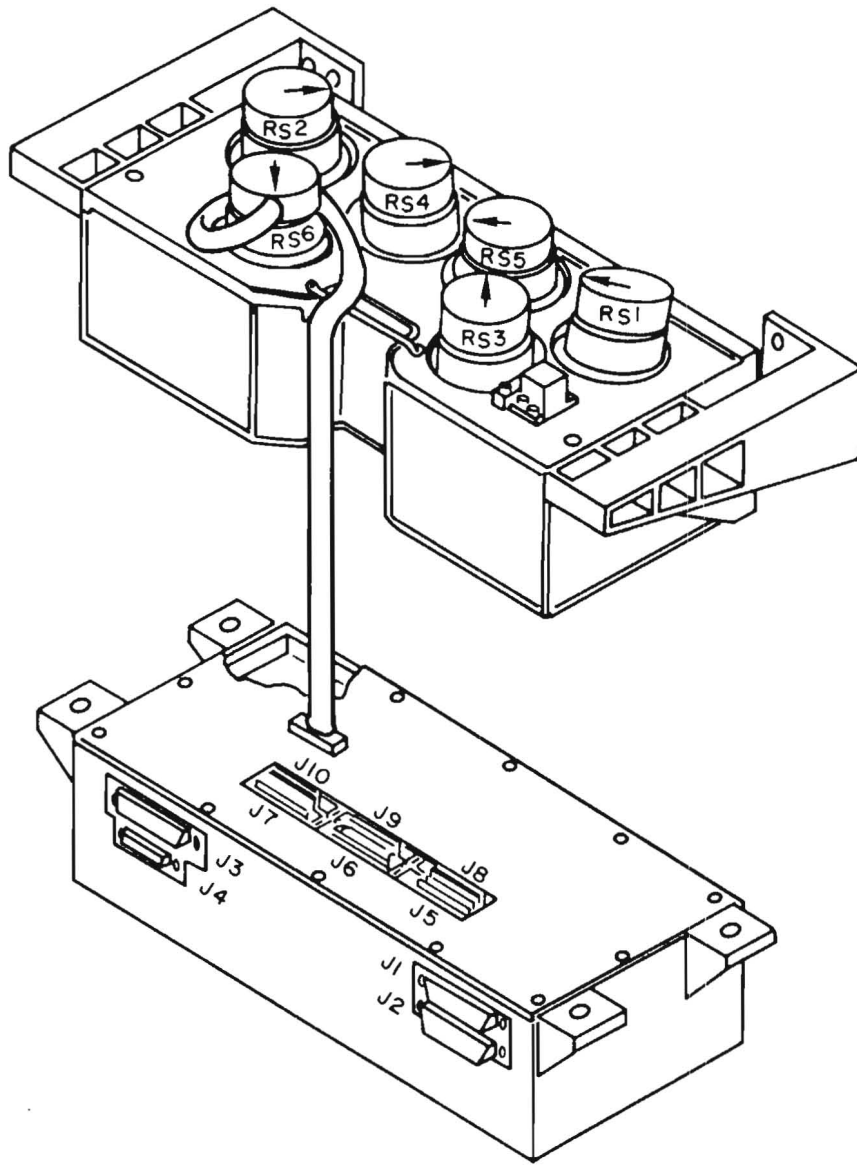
Inertial Reference Assembly Mechanical Outline Drawing
